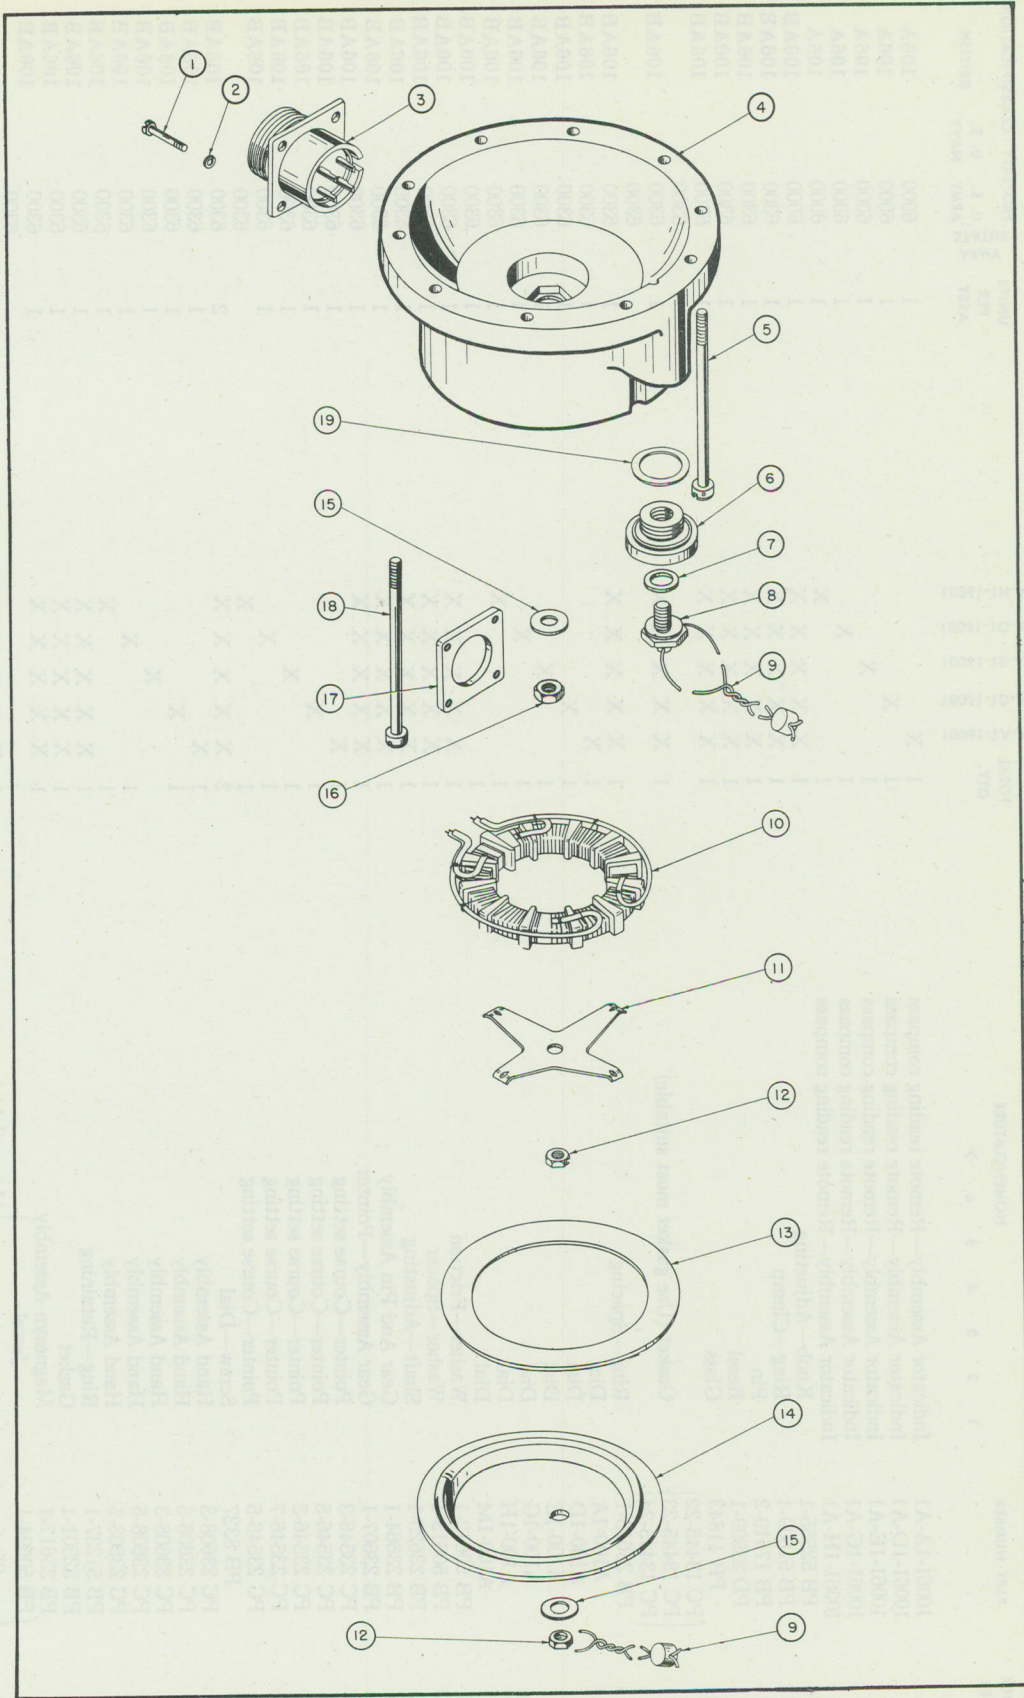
Exploded View Drawing—Main Assembly—Transmitter—Type AN 5730-3
